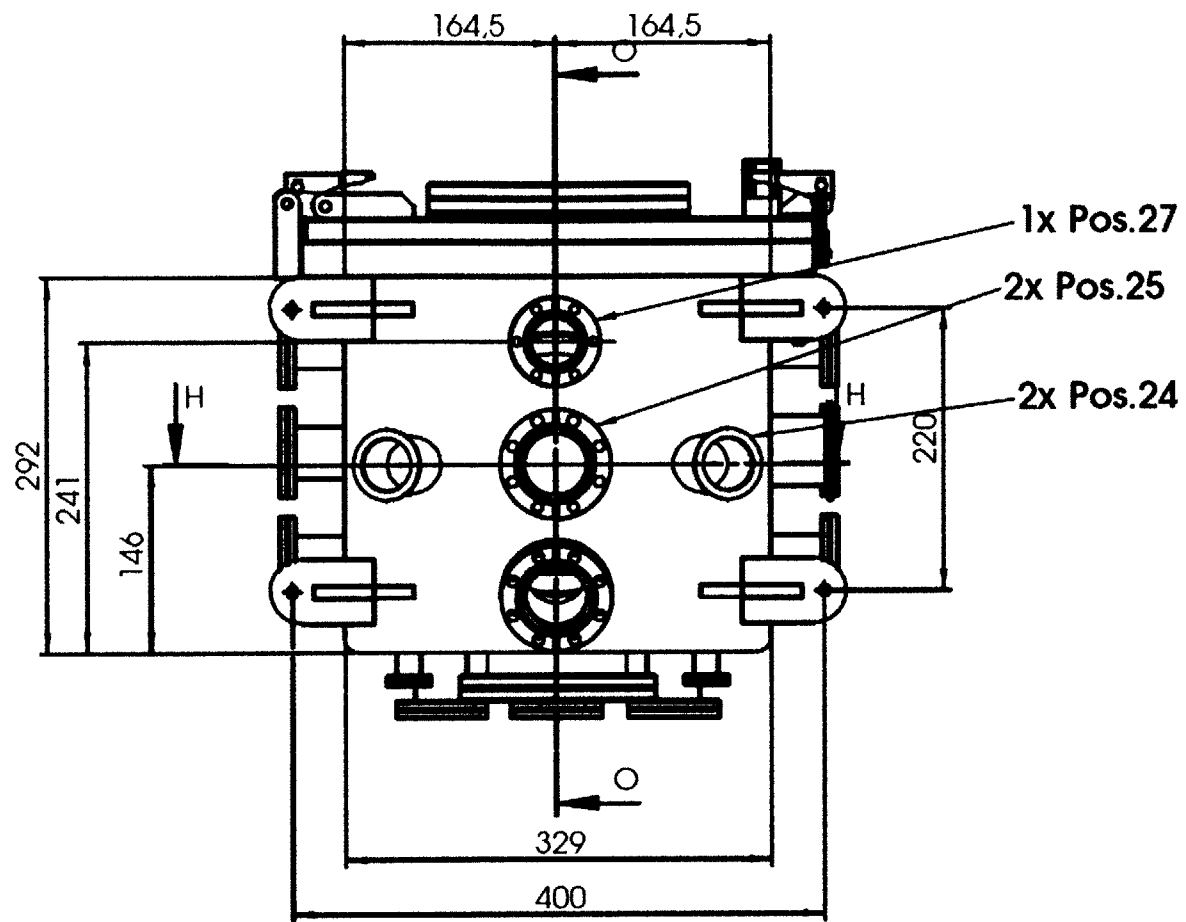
oCVD chamber engineering drawings – close-up of bottom of chamber
